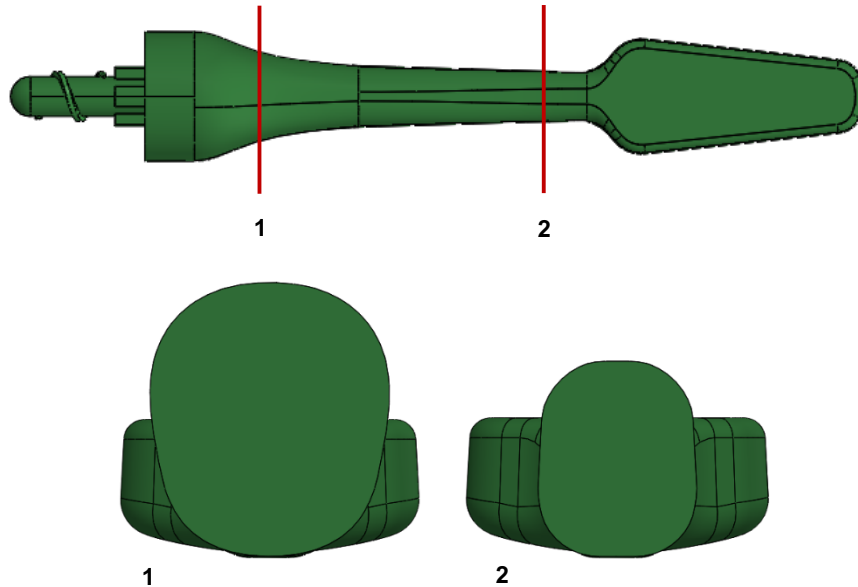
Front view of concept W with red lines illustrating cut section 1 and 2. Cut section 1 shows the negative drafts that occurred.
